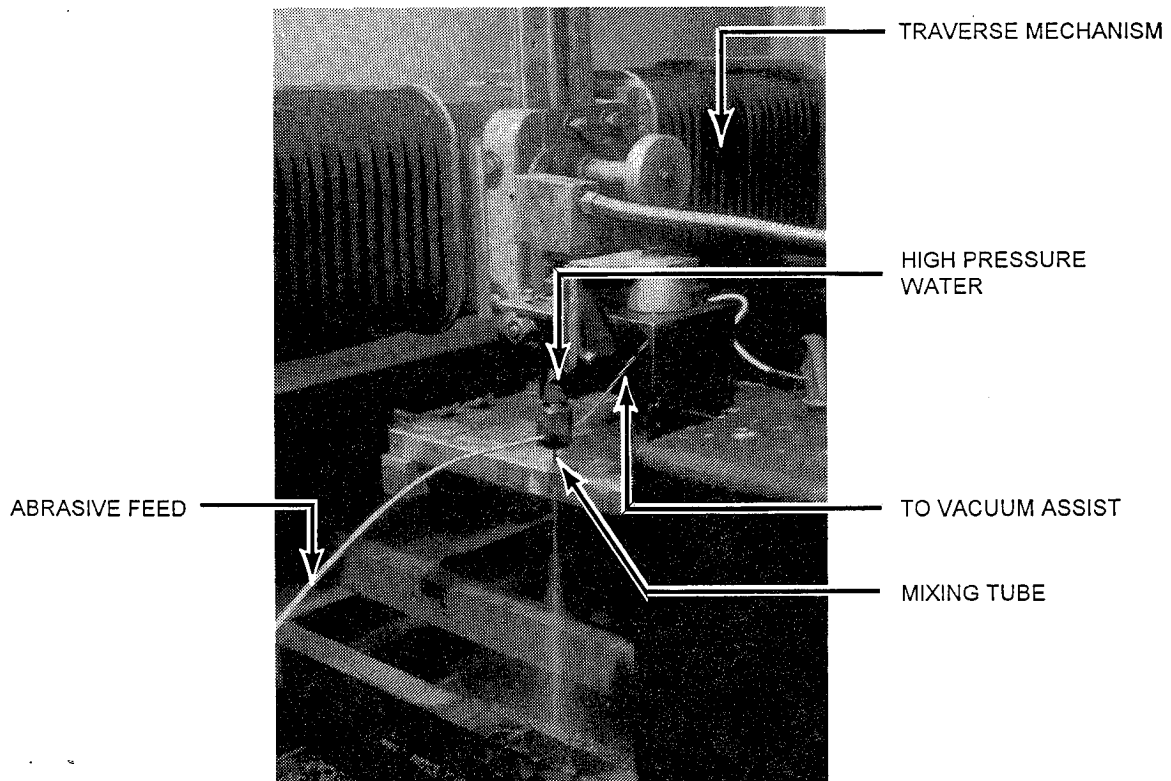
100-ksi Abrasive-Waterjet Nozzle Cutting Through a 1-Inch-Thick Steel Plate.
